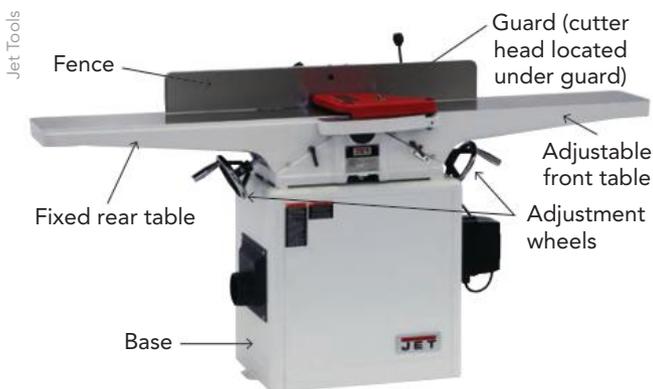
Jet Tools' 8" Jointer with Closed Stand
